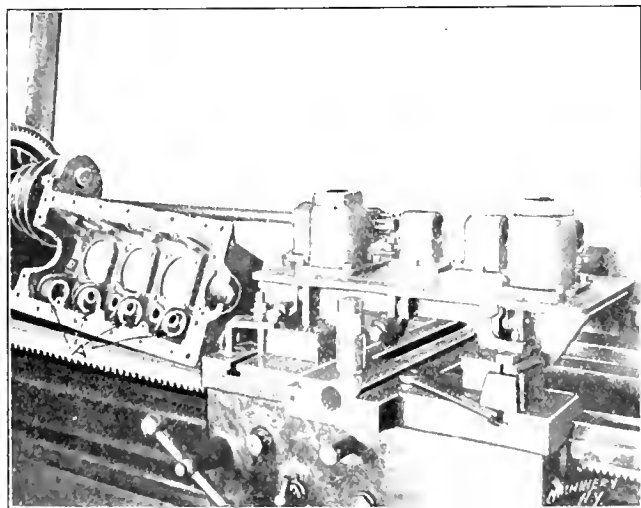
Fixture for Boring Cam-shaft Bearings in Engine Frame
